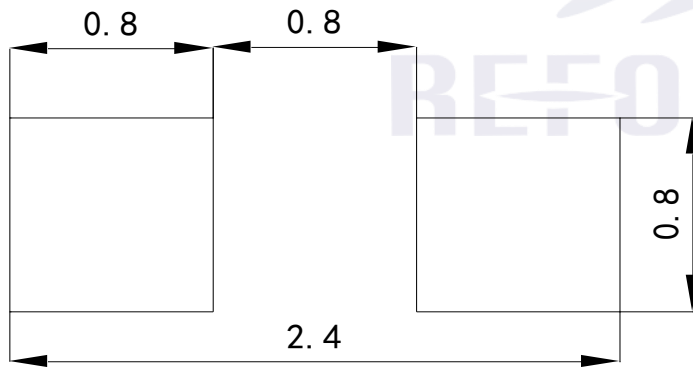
Soldering patterns 推荐焊盘
